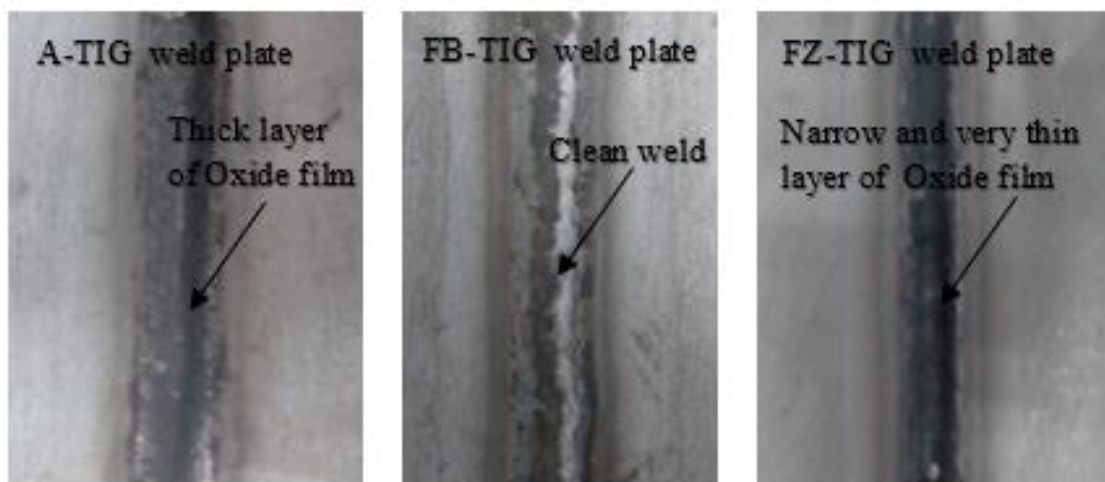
Weld bead appearance of A-TIG, FB-TIG and FZ-TIG weld joint
